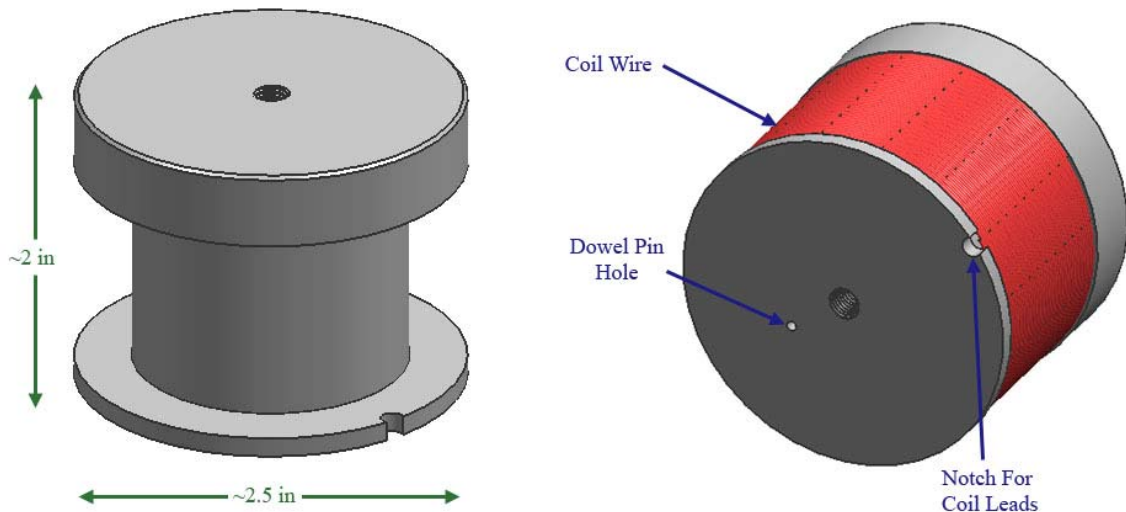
Magnet Core is wrapped with 22 AWG coil wire
